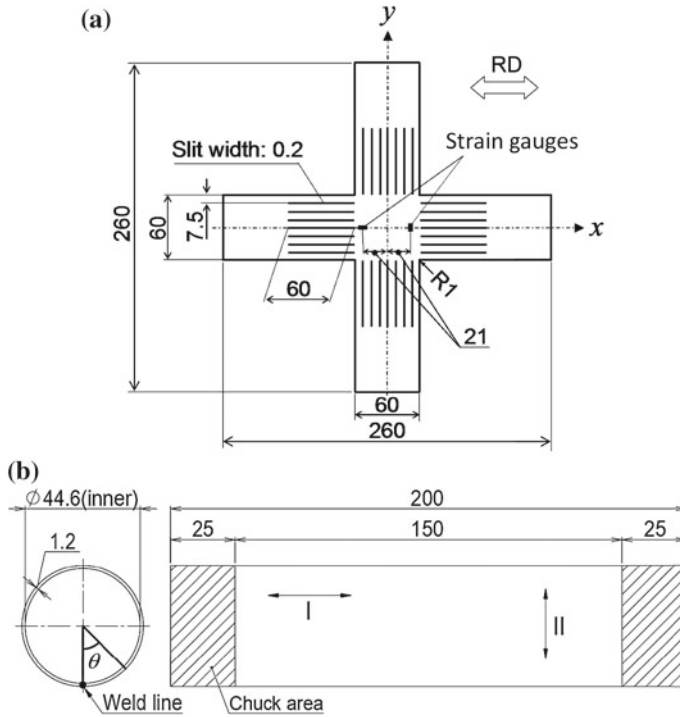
Specimens used for the biaxial tensile tests (units in mm): a cruciform specimen and b tubular specimen. In b, \leftrightarrow indicates the rolling direction (RD) of the original sheet sample, and the RD is taken in the axial direction for the type I specimen and in the circumferential direction for the type II specimen; θ indicates the angle from the weld line
